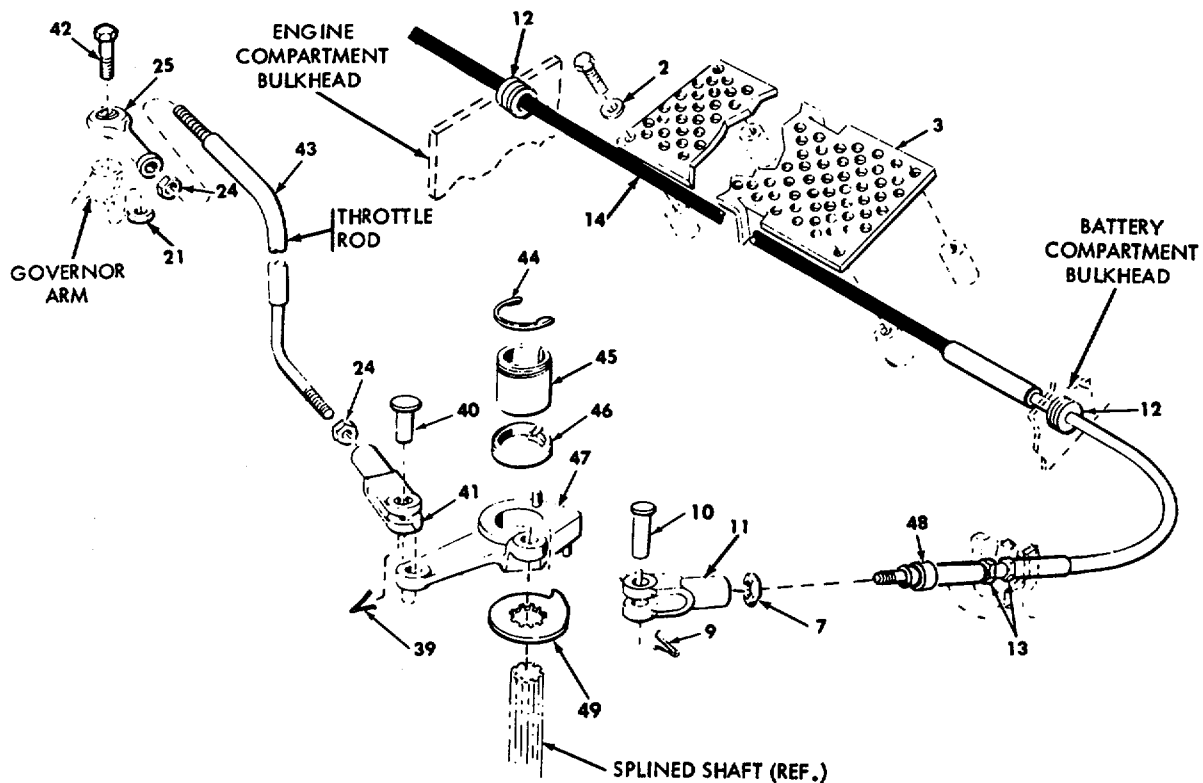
Disassembly/assembly - accelerator and throttle control assembly and linkage (1 of 2)
